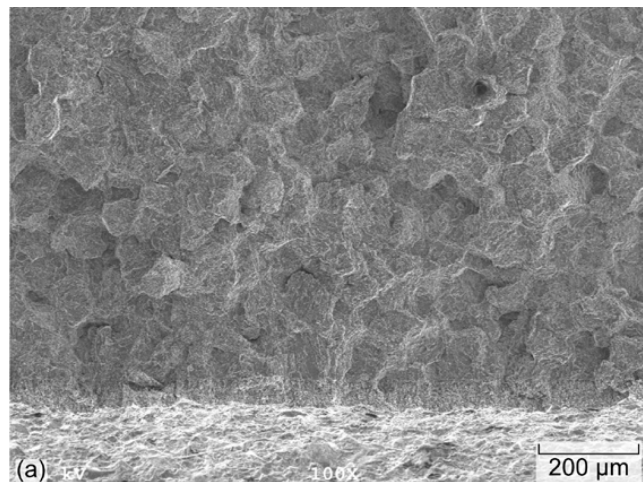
SEM photomicrographs of representative fracture surfaces for (a) Cast-A, (b) PM-X and (c) PM-Y 60-NITINOL materials in the furnace-cooled heat treatment condition showing intergranular fracture.
